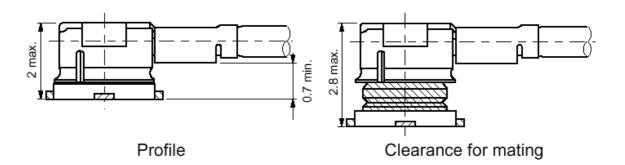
Mechanical dimensions of MuRata GSC connector (in mm)
